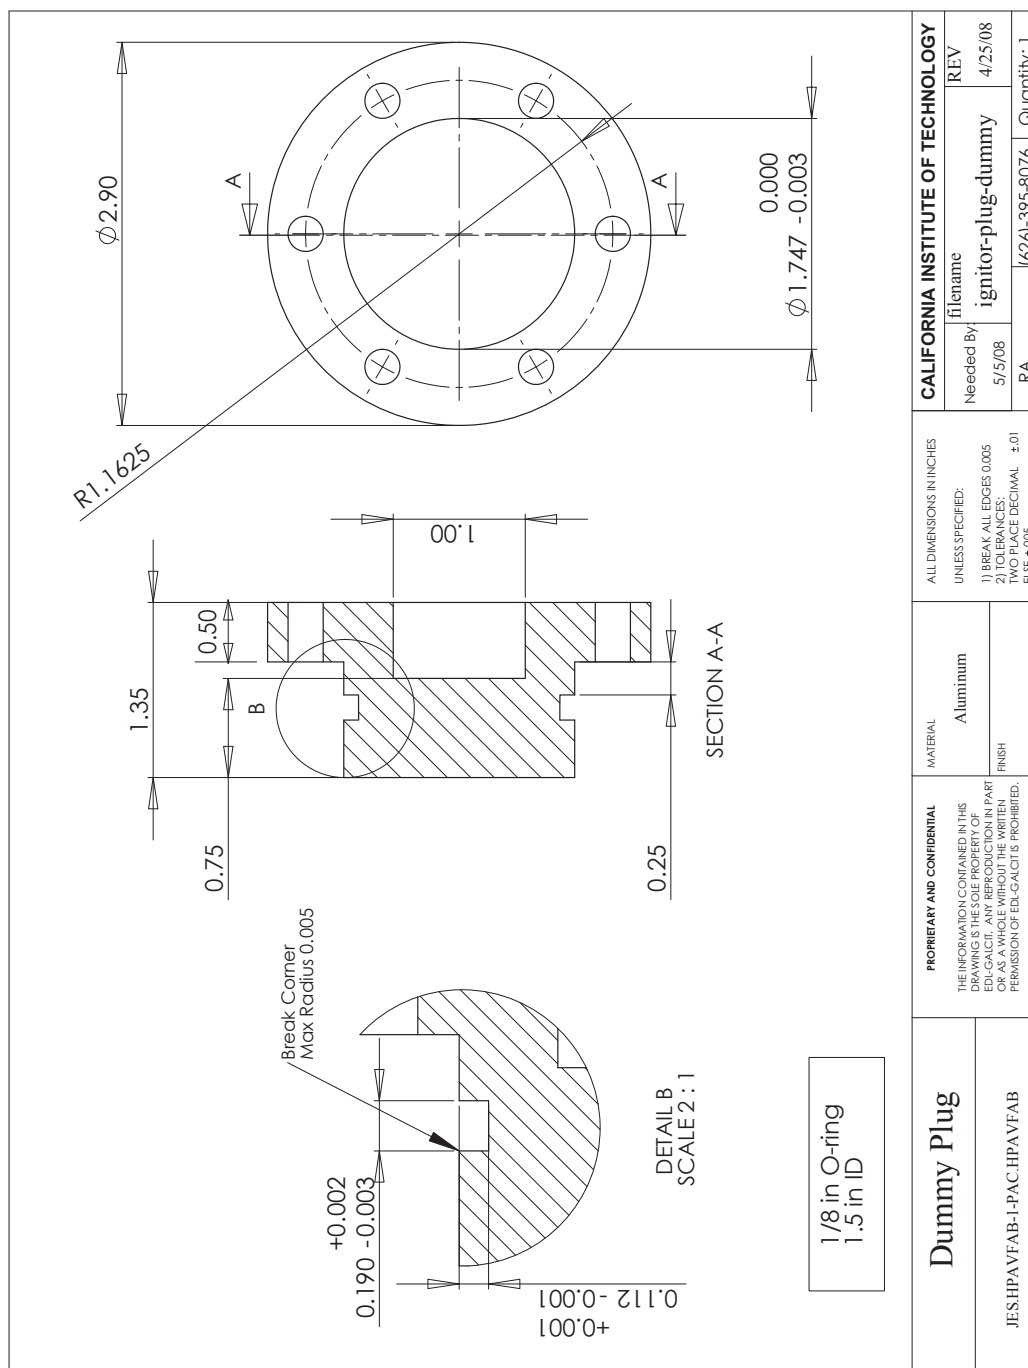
Plug used to mount PCB transducer in gas handling flange.
